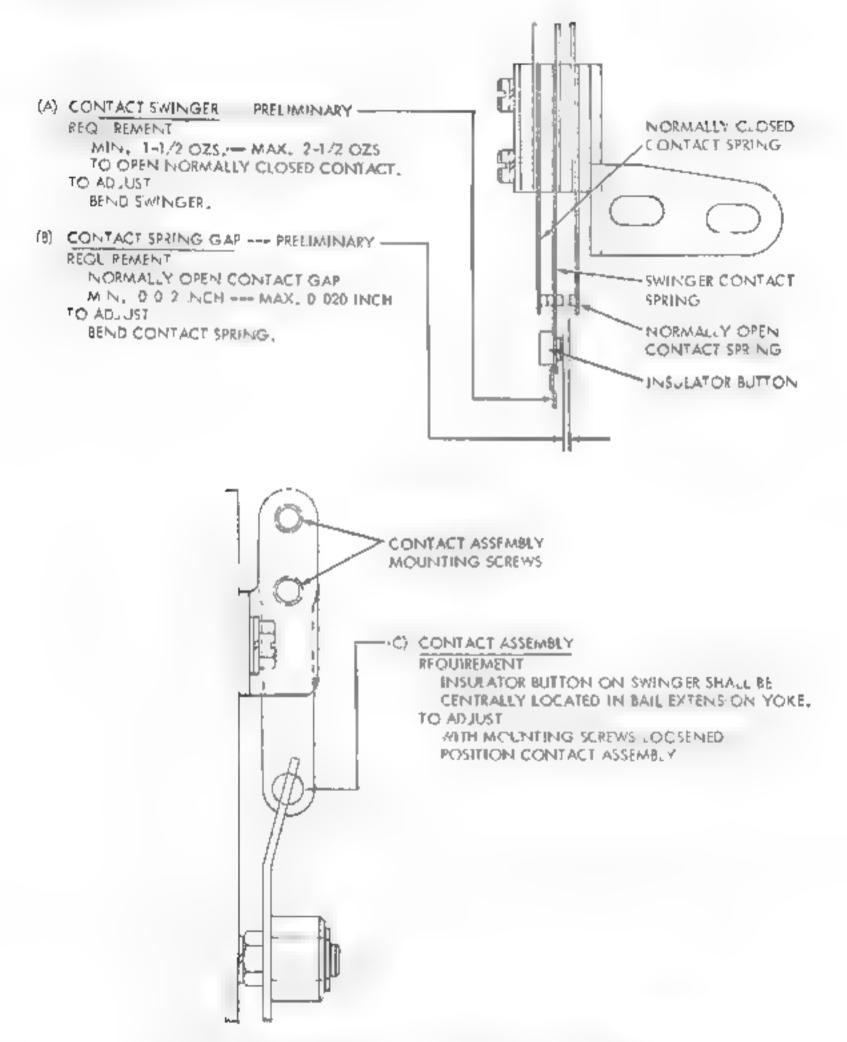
END OF FEED-OUT TIMING CONTACT FOR NON-INTERFERING LETTERS AND BLANK FEED-OUT MECHANISMS
